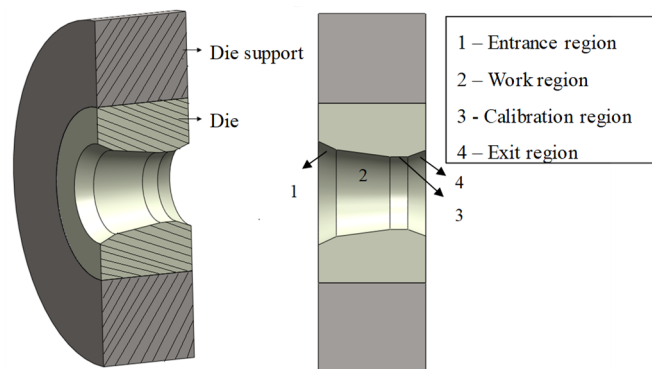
(a) Drawing tool and (b) parts of the die. Source: adapted from Soares (2012).
